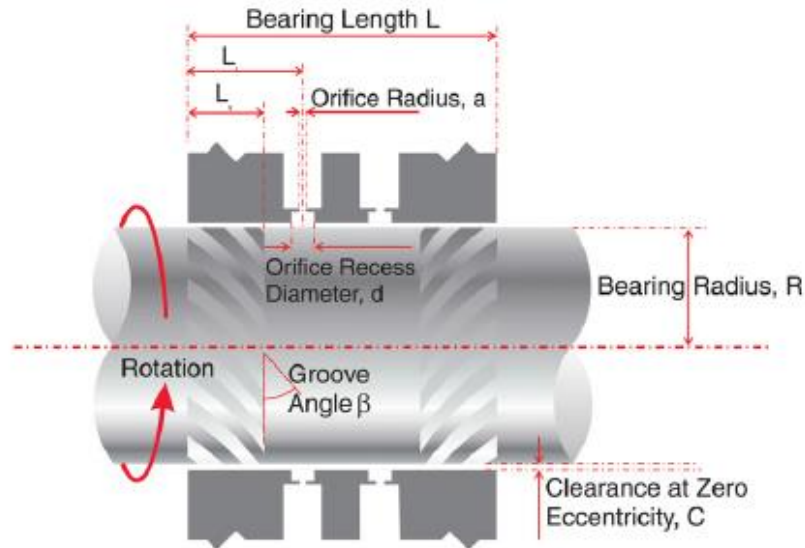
Grooved hybrid air bearings designed by P. Stanev, F. P. Wardle, J. Corbett[2]
